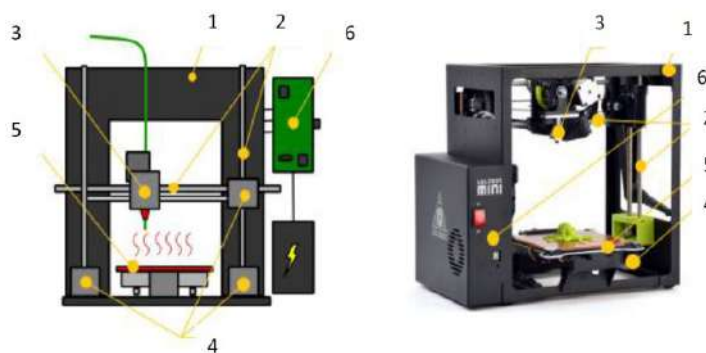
Scheme of the FDM 3D printer device: 1 - case, 2 - guides fixed on it, 3 - print head, 4 - stepper motors, 5 - desktop; 6 - control electronics.
